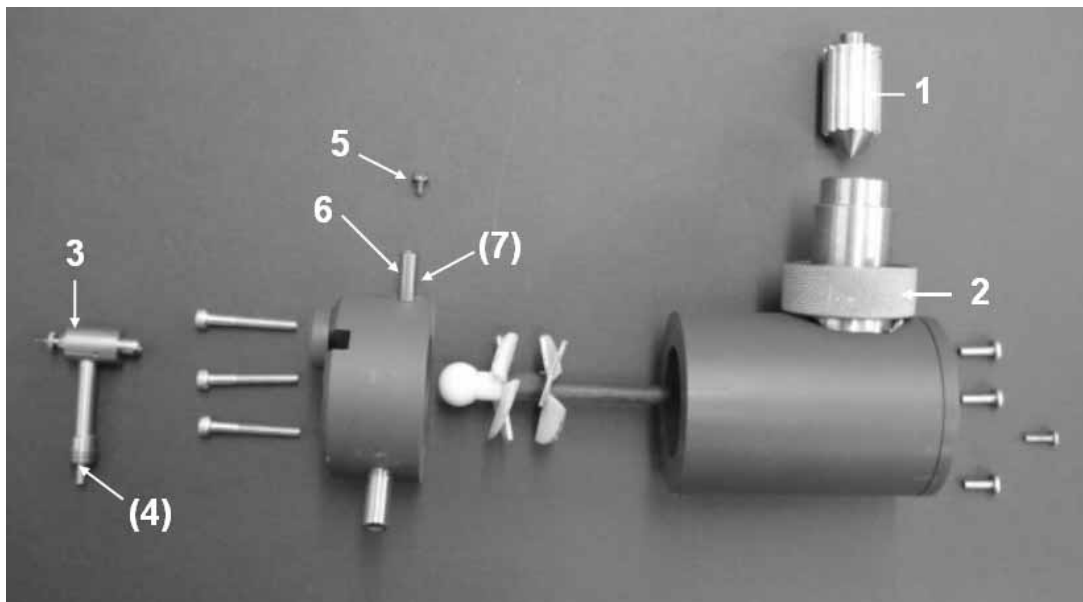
Assembly of the mixing chamber, burner and nebuliser.
